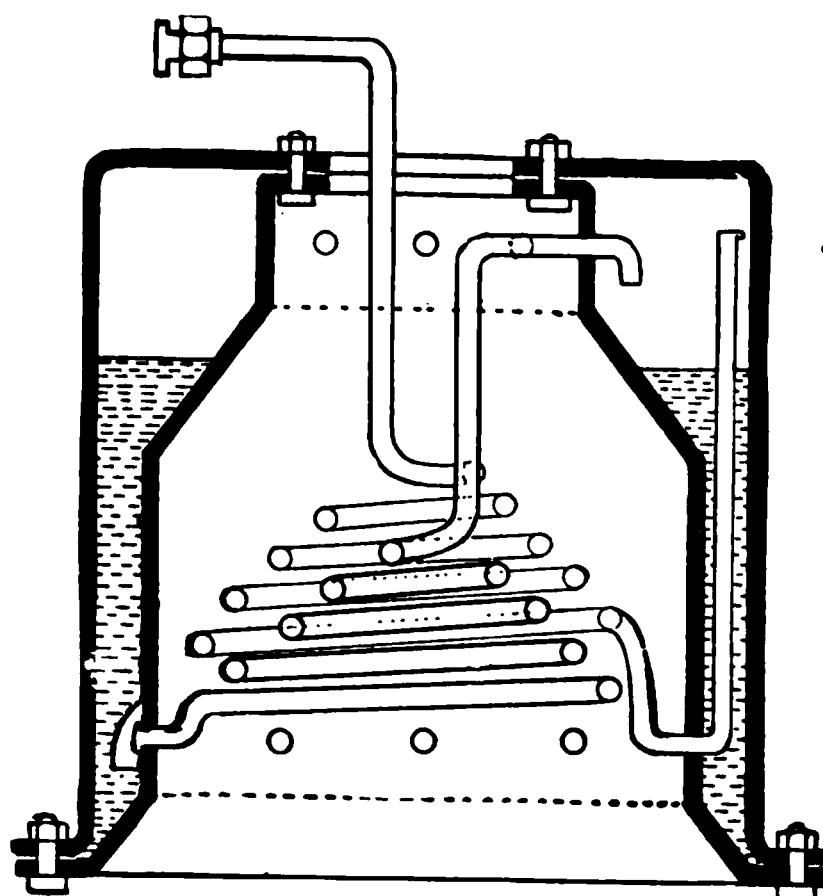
Sectional Elevation of the Morgan Boiler, formerly used on the Toledo Carriage. The disposition of the coils may be understood from these cuts, also the steam connections through the superheating coil. The sectional view shows the steam superheating and one of the generating coils in position, with connections indicated for other coils. As shown, the steam enters a vertical tube somewhat below the top of the steam space; thence flowing downward, through one of the coils above the fire and out to the engine through the feed pipe.
